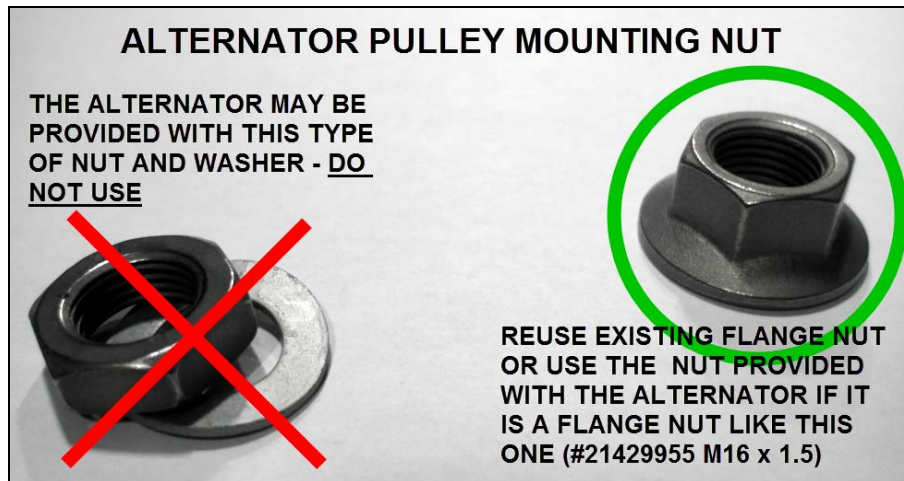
PULLEY MOUNTING NUT – DO NOT USE THE STANDARD NUT AND SPRING WASHER THAT MAY BE PROVIDED WITH THE ALTERNATOR. A FLANGE NUT MUST BE USED
